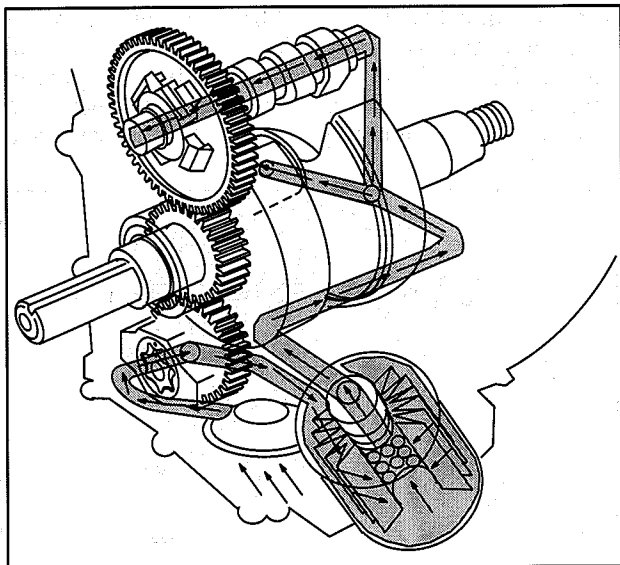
Full Pressure Lubrication System - Horizontal Crankshaft
